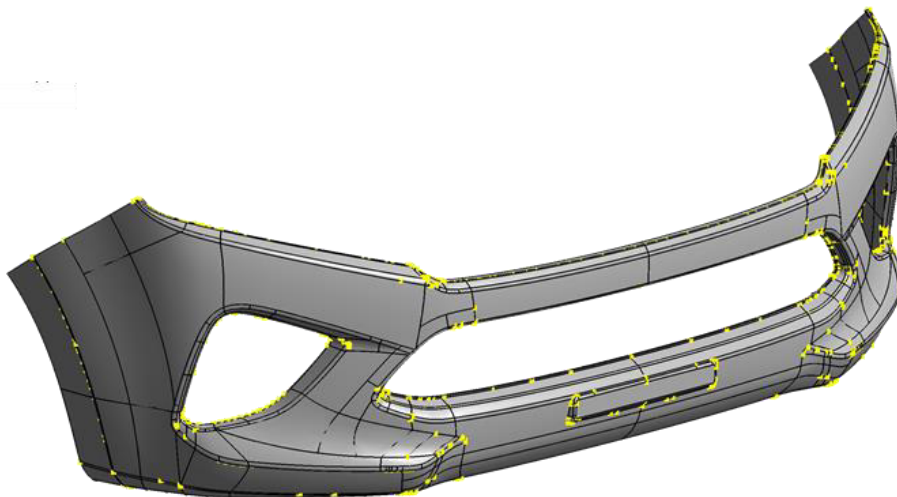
CAD model of bumper with highlighted close vertices (Ansys Mechanical standard tool for highlighting dirty geometry)
